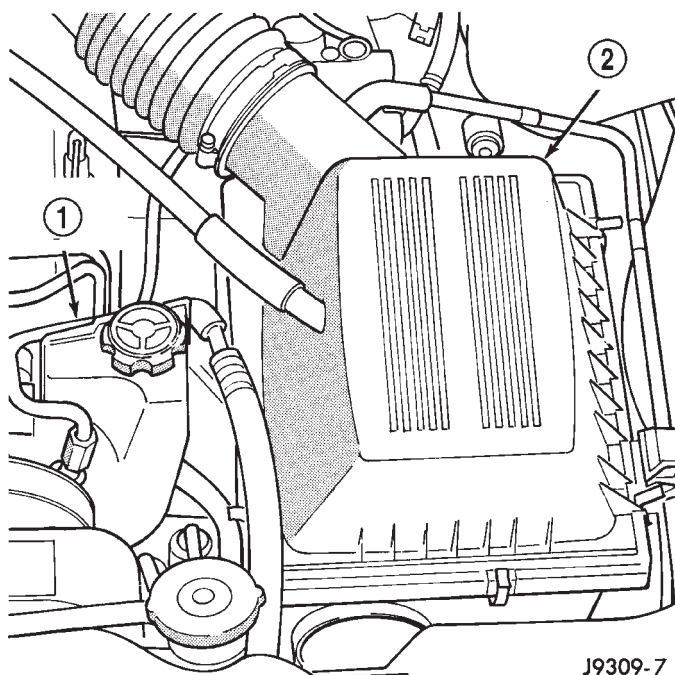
Air Cleaner Assembly & Power Steering Pump
